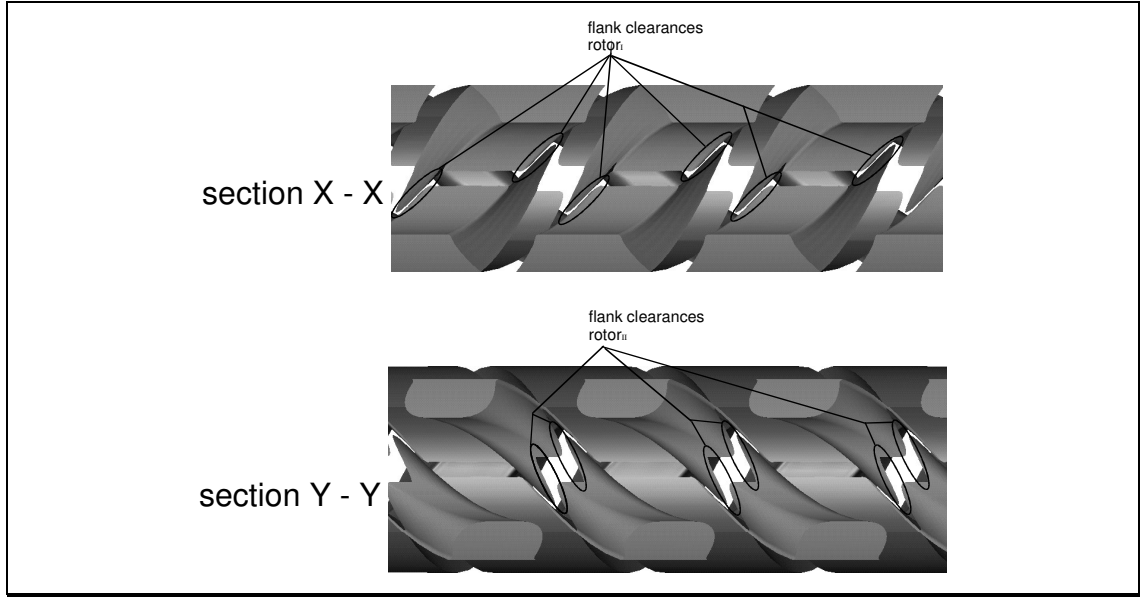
Sections through the fluid in the chamber - the flank clearances (see Figure 73 for positions of sections)
